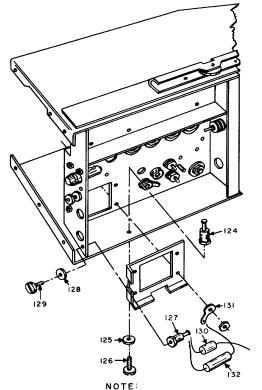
Power Supply PP-2795/FSW-8 (part of OA-3014/FSW-8), exploded view-Continued
